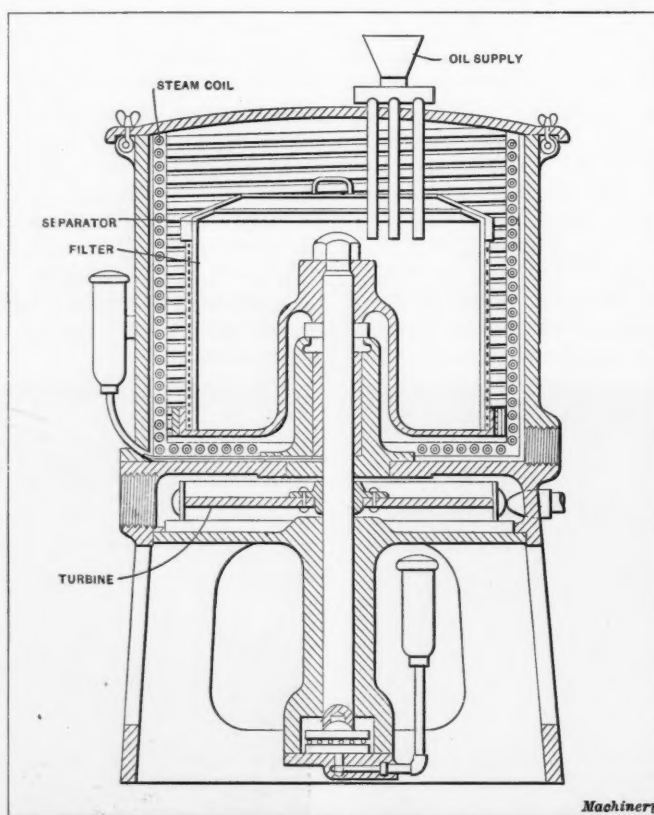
Vertical Section through Oil-drying, Filtering and Sterilizing Machine
